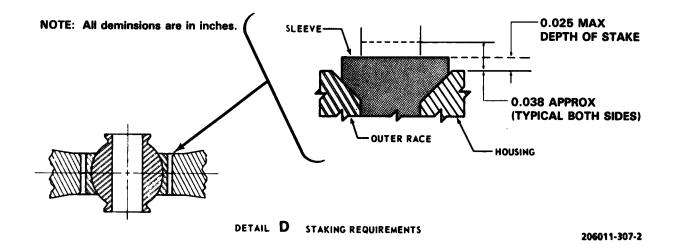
Replacement — Tail Rotor Blade Bearing (Sheet 2)
